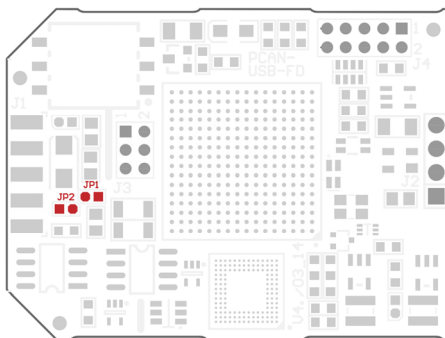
Top view PCAN-USB FD board, solder fields JP1 and JP2
